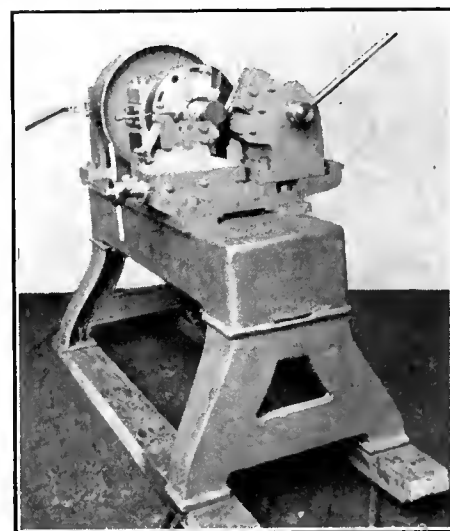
JENCKES MACHINE CO. BAND TURNING LATHE.
